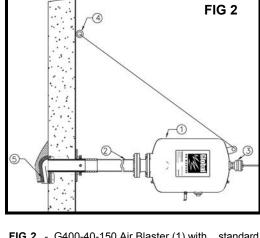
G400-40-150 Air Blaster (1) with standard G-Series Quick Exhaust Valve (3) mounted on a Global 4HT straight discharge assembly (2). The discharge assembly has no long radius bend, but provides 42" of pipe for adequate heat dissapation. The disharge assembly includes a mount flange for the Air Blaster & a mount plate that can be welded to the side of the kiln. The mount plate allows the Global 4HTPA stainless steel adjustable angled nozzle (5) to be replaced without dismounting the Air Blaster. (4) is a Global safety cable kit with 14' of aircraft cable.
